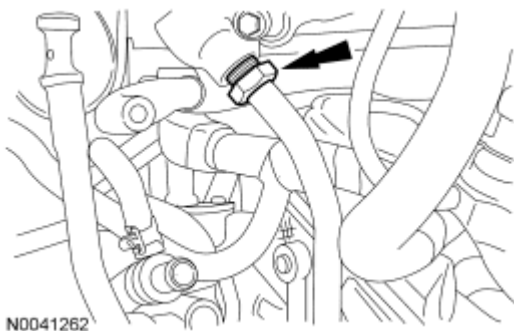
Locating EGR Tube-To-EGR Valve Nut
